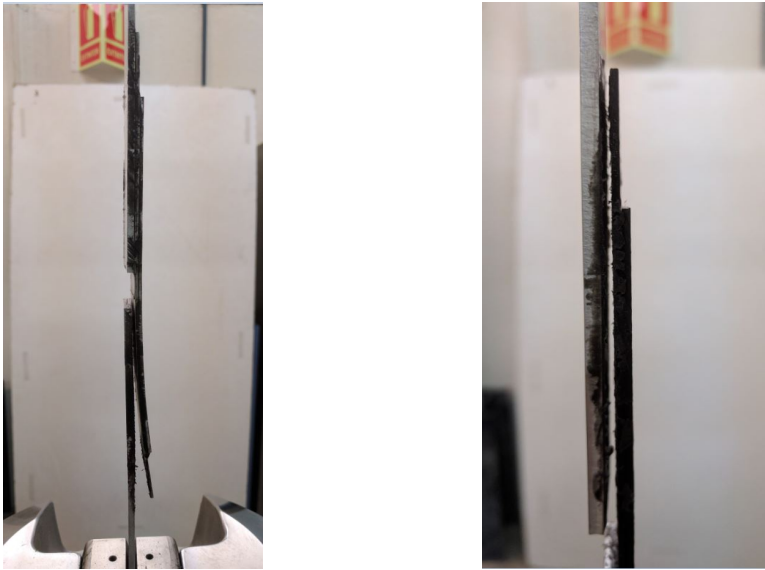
Rivet shear failure of metal-metal (left) and metal-composite (right) riveted joints [70].
